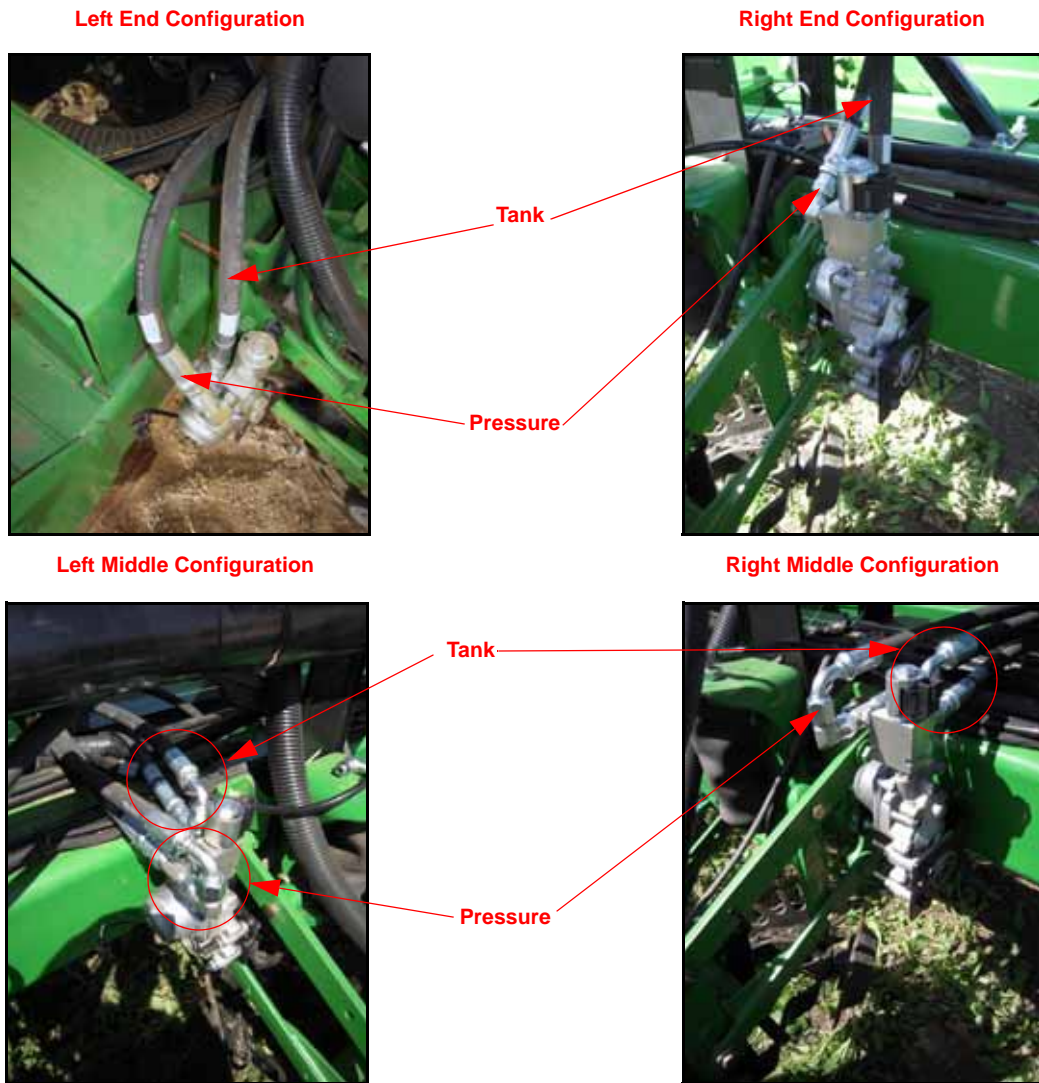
Pressure and Tank Hoses Installed - Outboard Mounted Motors
